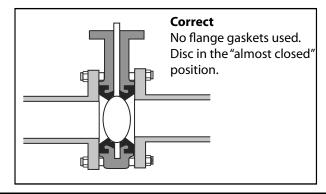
CENTERING AND FLANGING OF VALVE
